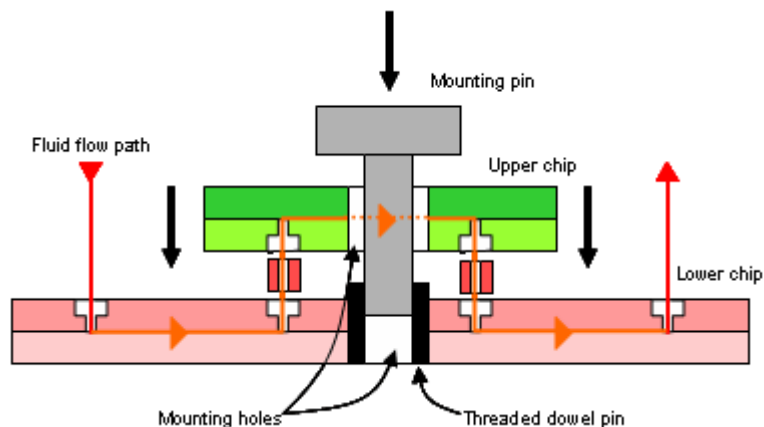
8: Illustration of the assembly technique of Epigem chip and breadboard, Courtesy of Epigem.
